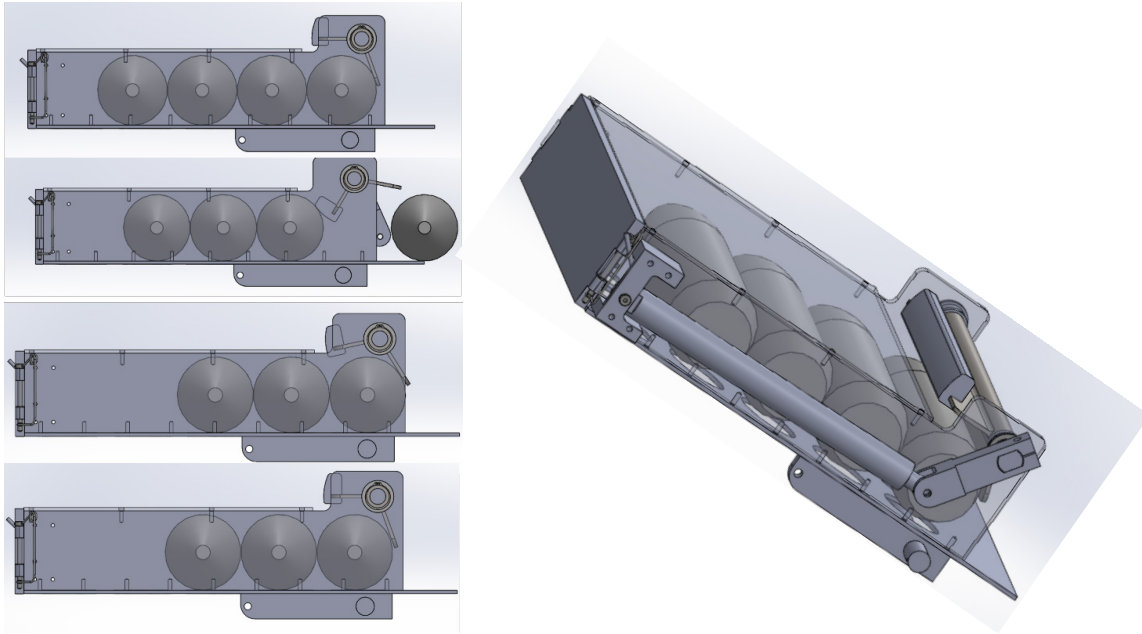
Roll-in-place Dispensing Latching Mechanism.
